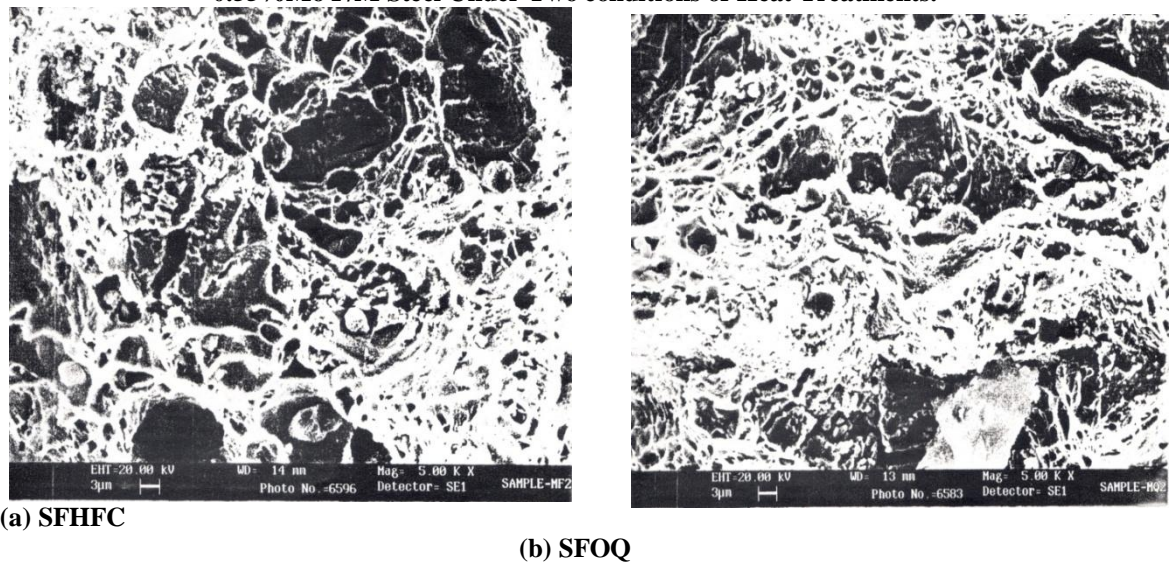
SEM Fractographs of Tensile Tested Specimen fractured Surfaces of Fe-0.16%C-2.25%Cr-1.05%Mo P/M Steel Under Two conditions of Heat Treatments.
